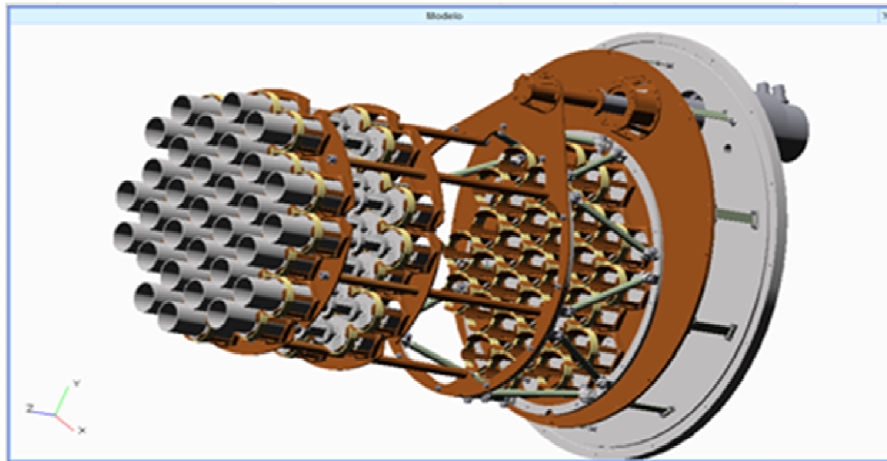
A 3D view of the cryostat with the radiation shields and top cover removed.
